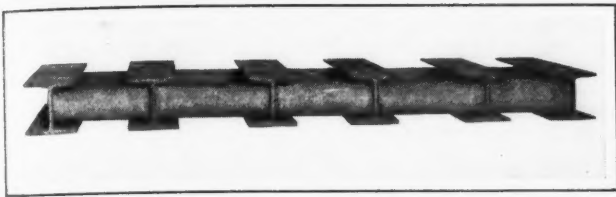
A Welded Base for Supporting Three Machines
